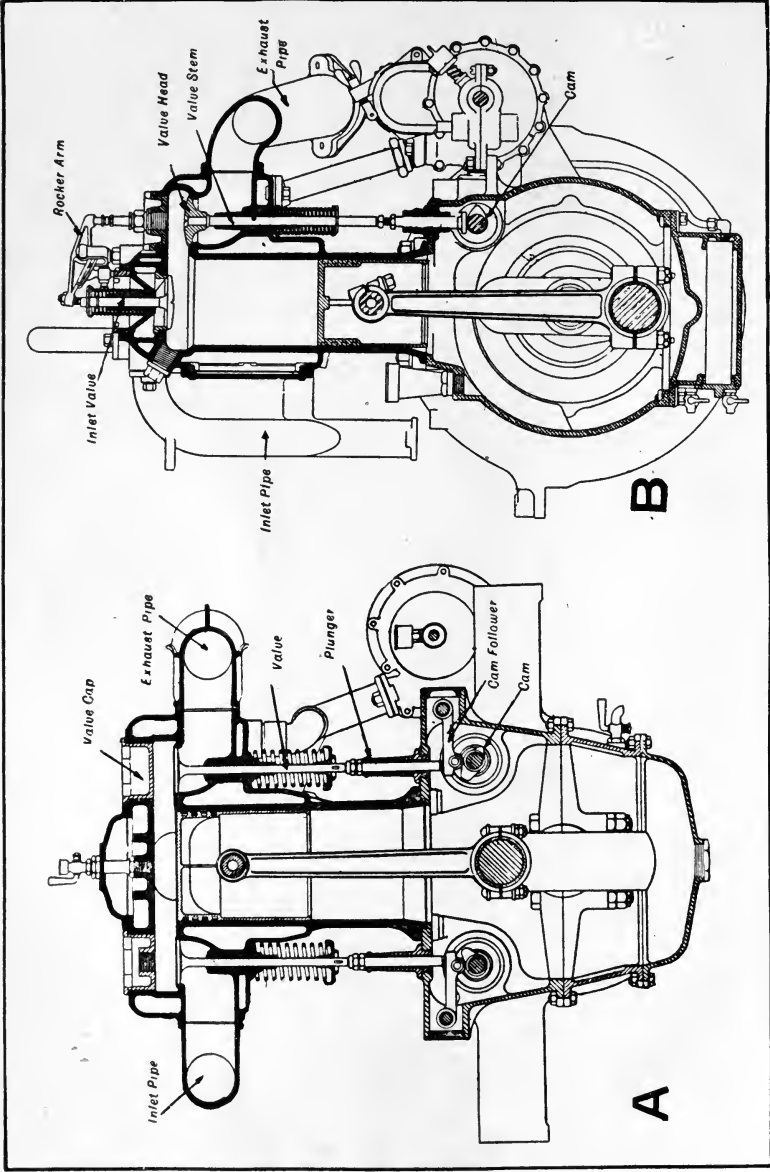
Illustrating Typical Methods of Valve Installation in Internal Combustion Motors. A—Valves on Opposite Sides of T Head Cylinder. B—L Head Cylinder Having Intake Valve Placed Directly in the Center of the Cylinder Head
